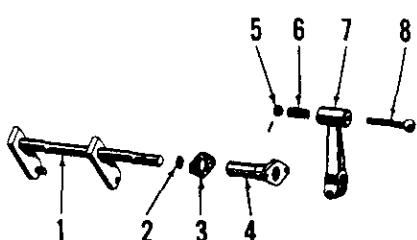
Exploded view of the dual speed shifter located on right side of the clutch housing.
